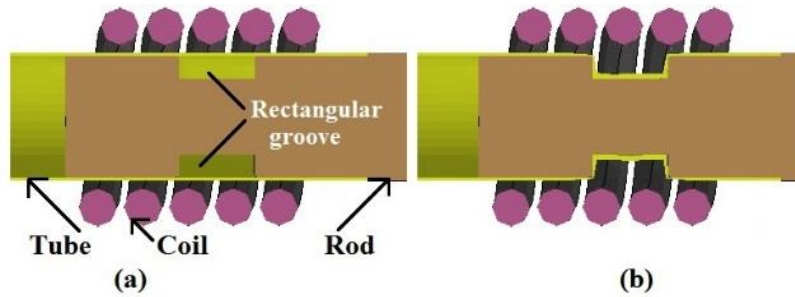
3 Workpieces shape (a) before and (b) after deformation
